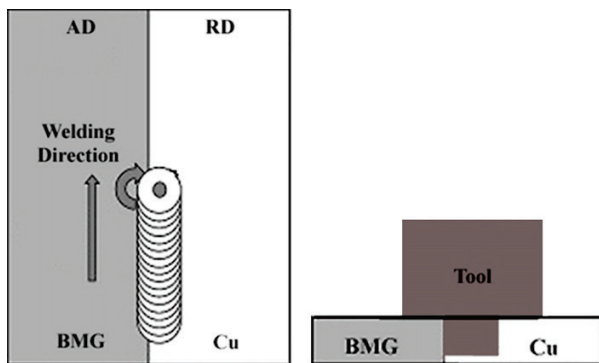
Schematic illustration showing the tool and work-piece positions during the FSW process. (Yufeng Sun et al.2010)
